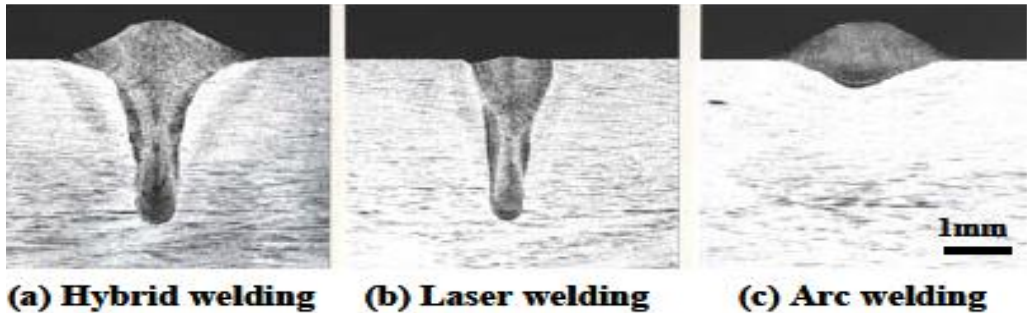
Penetration of arc welding , laser welding and laser-arc hybrid welds
